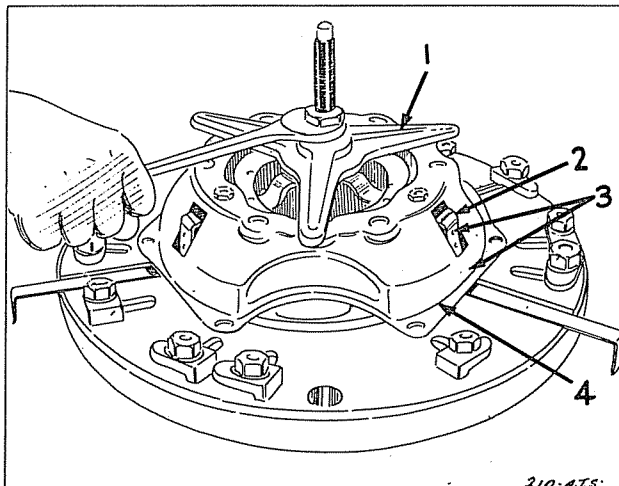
Clutch Cover and Pressure Plate Assembly in Fixture C-585-B.
